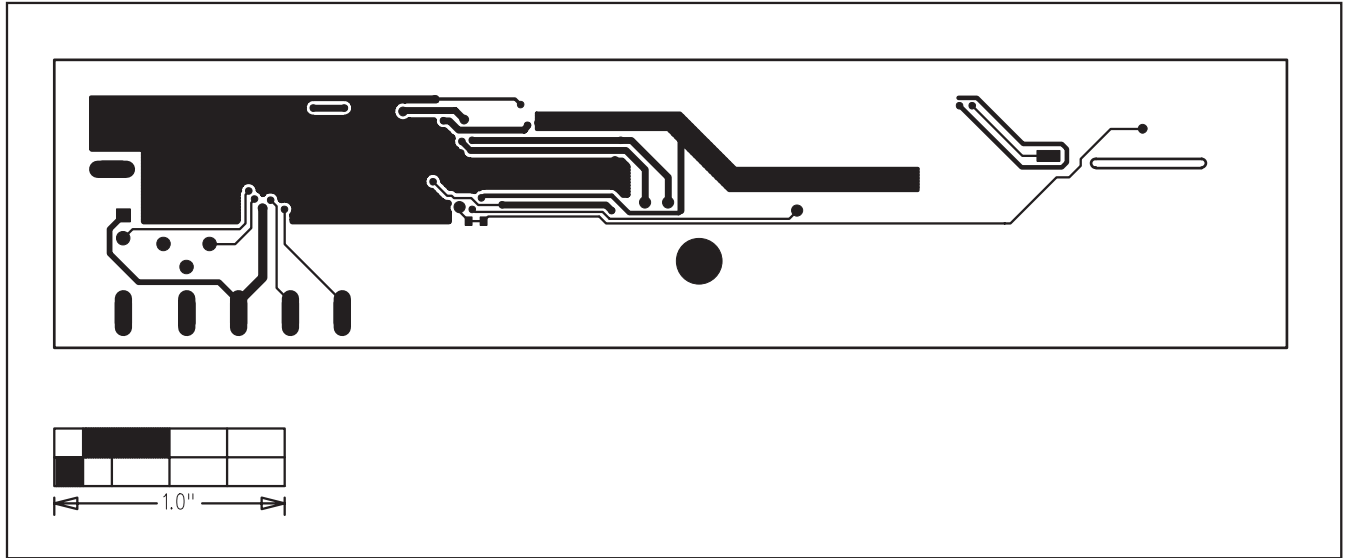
MAX8785A EV Kit PCB Layout—Solder Side
